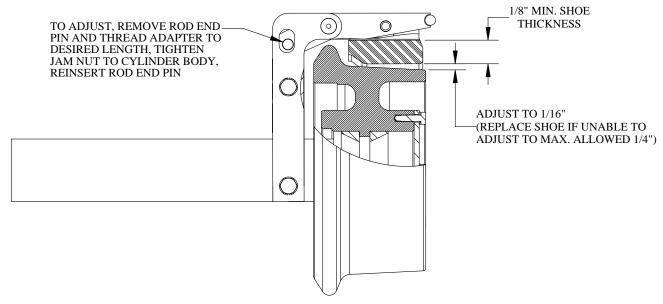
Hydraulic Brake Inspection and Adjustment
